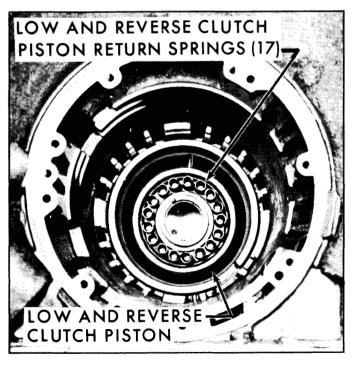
Low and Reverse Clutch Piston Springs and Piston
